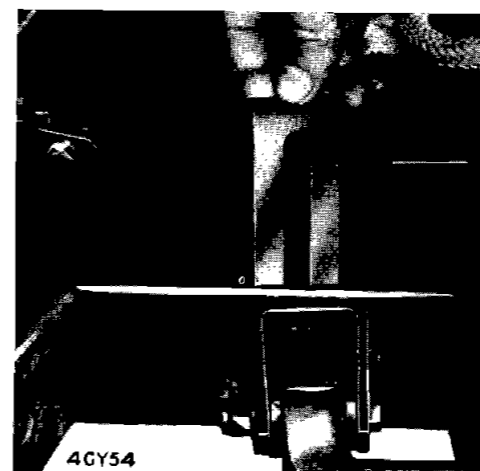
Fitting shims between lower fulcrum bracket and chassis frame
